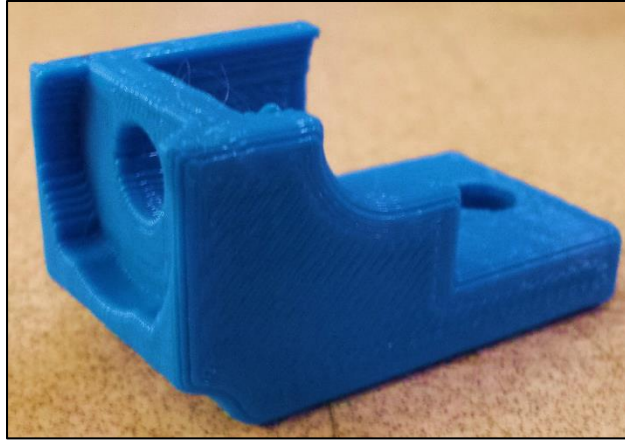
3D printed part. Attaches the shoulder bolt to the free flyer
